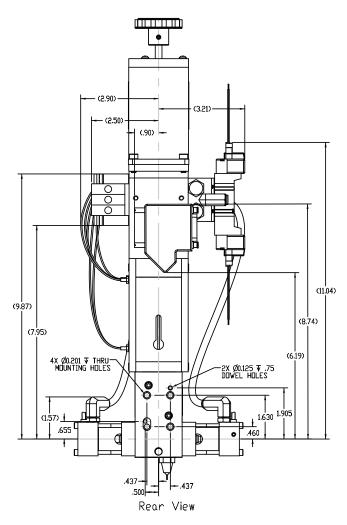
Therm-O-Flow Valve Mounting Diagram 2
